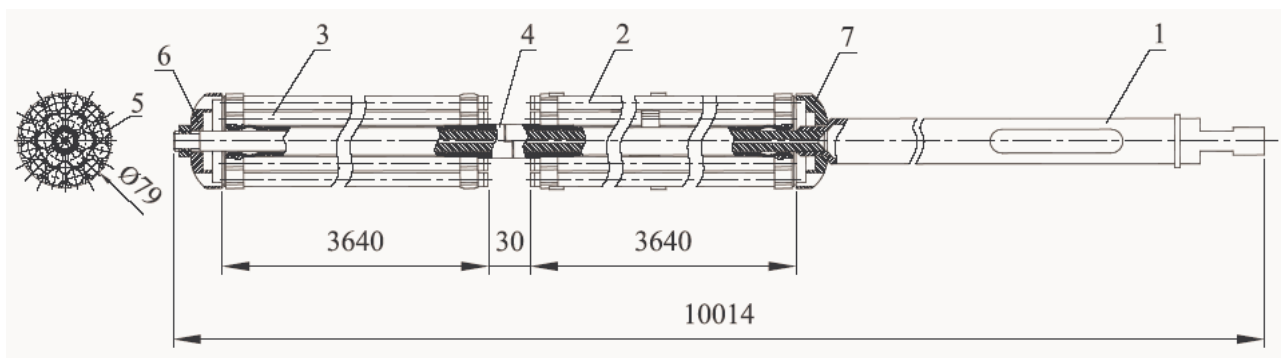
Typical RBMK-1500 fuel assembly: 1 – extension rod, 2 – upper fuel rod bundle, 3 – lower fuel rod bundle, 4 – central rod/tube, 5 – fuel rod, 6 – lower cap, 7 – upper cap
